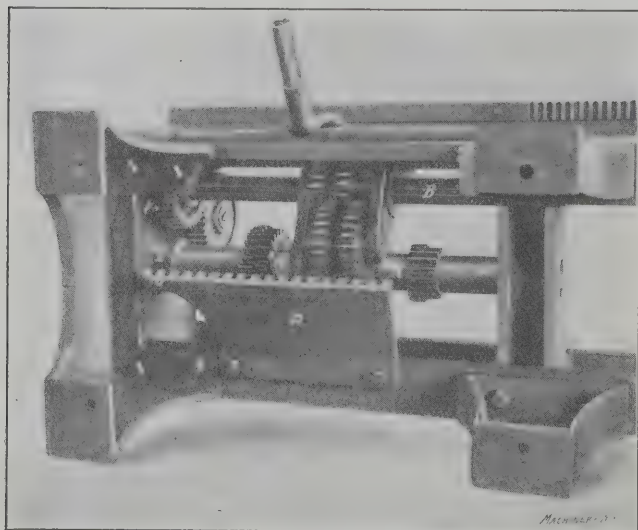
Quick-change Gear Mechanism of Lathe shown in Fig. 1
